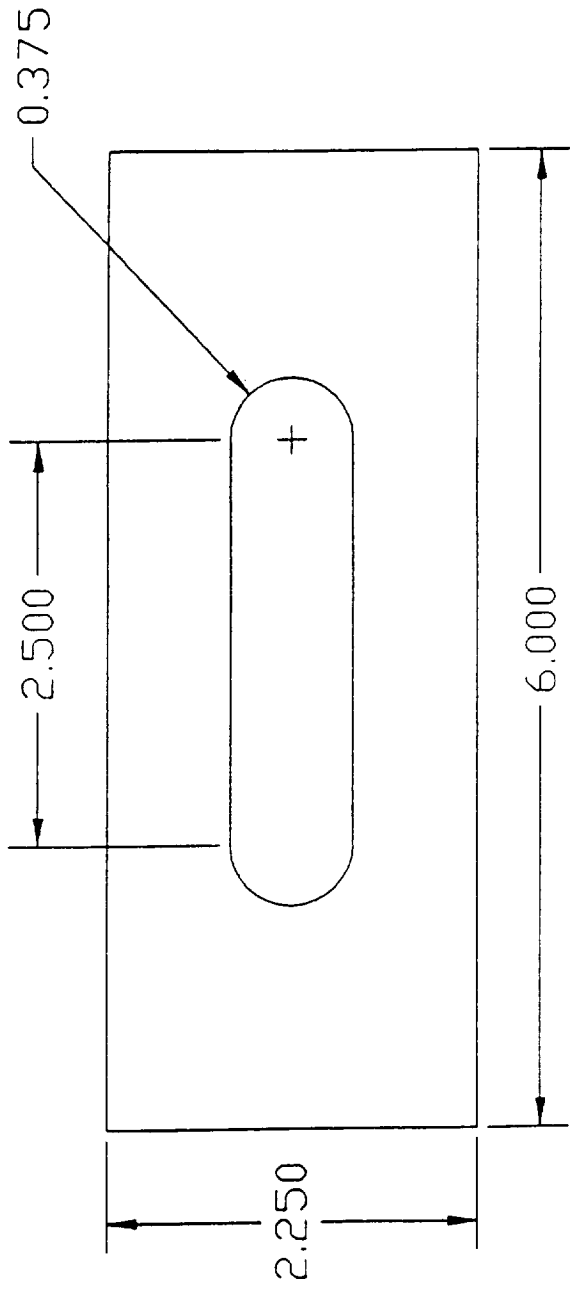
A. Eight Inch Hot Air Nozzle Geometry, Inlet
